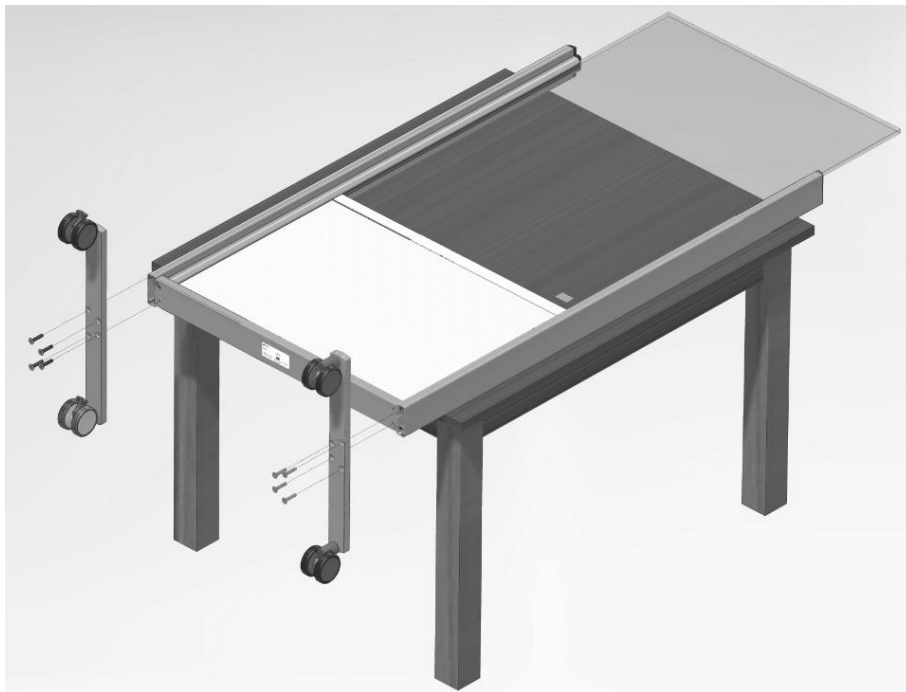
Shield Assembly Placed on Flat Surface for Assembly.
